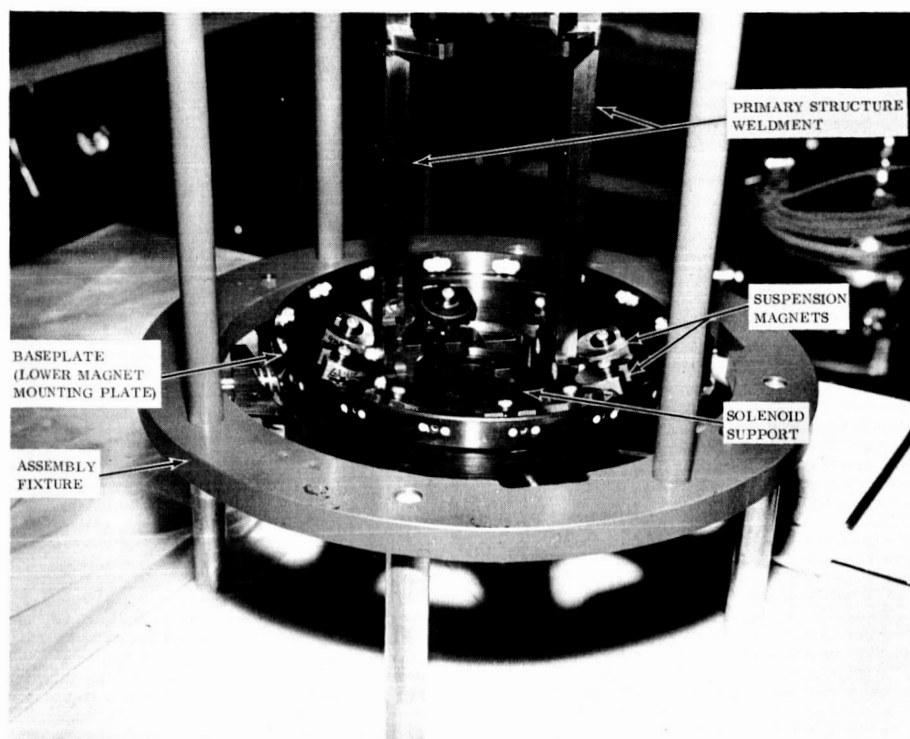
Lower Magnet Mounting Plate of Eddy-Current Damper, CPD Engineering Unit 1
